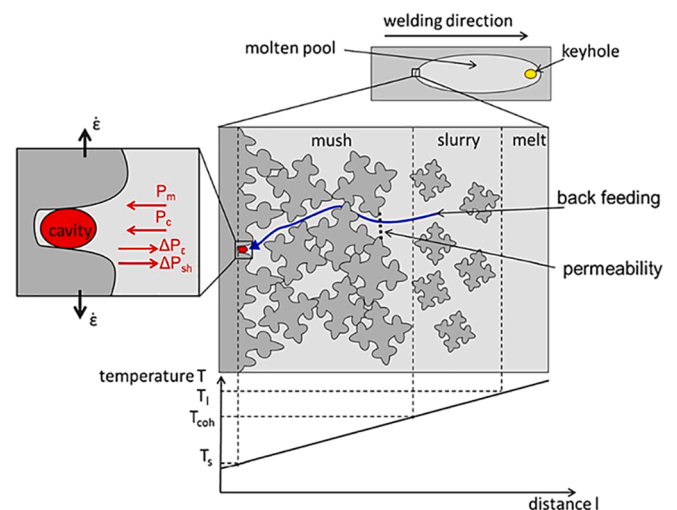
Schematic of the weld pool in laser welding (Tang and Vollertsen, 2014).
